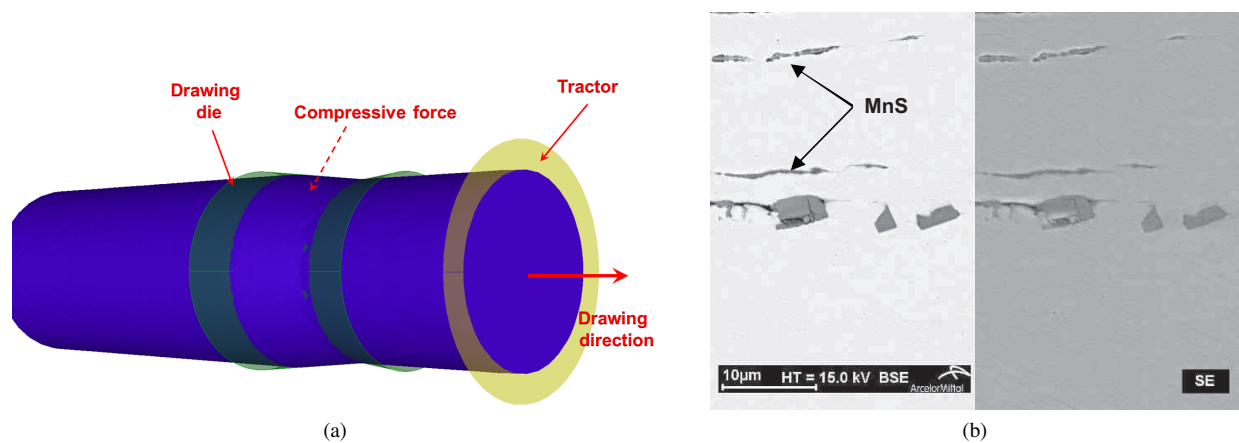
(a) Schematic of drawing; and (b) SEM images of microstructure in the drawing direction (horizontal direction) after four passes wire drawing [15]).
